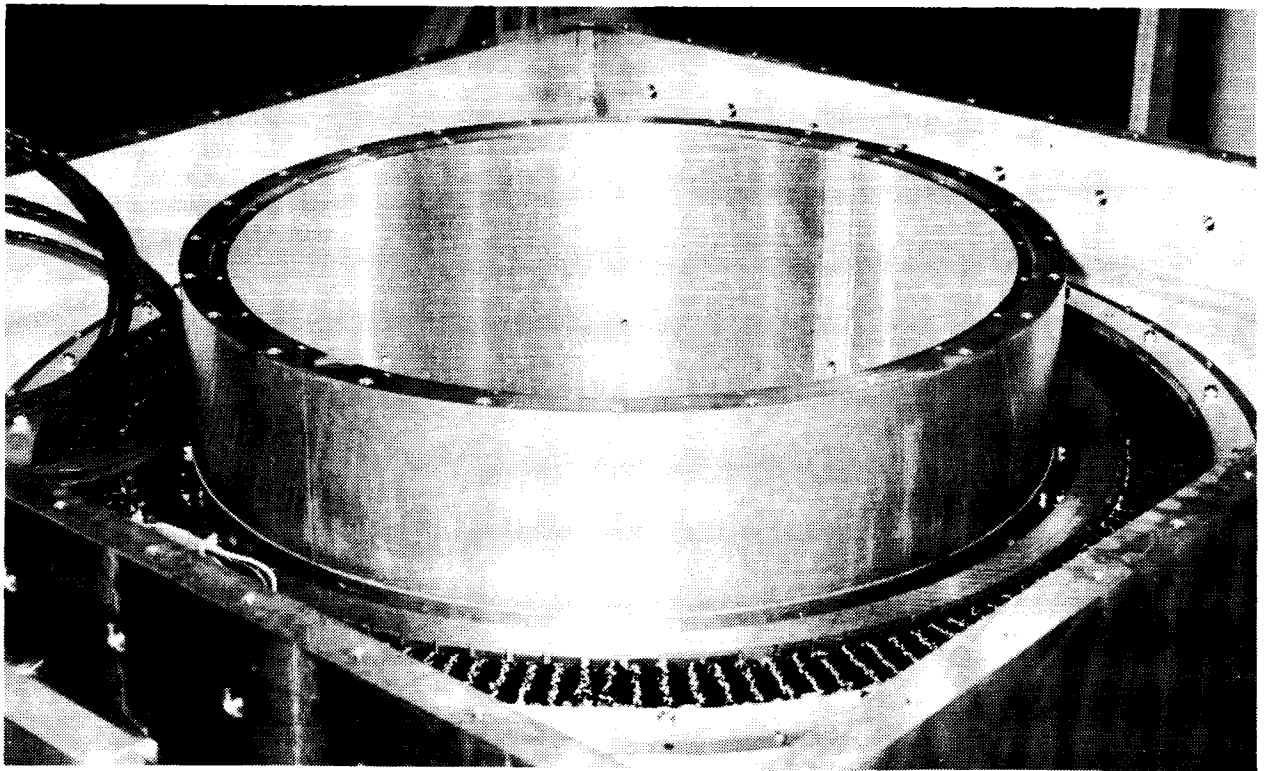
Tilt Axis Assembly with AC Brushless Motor Uncovered
